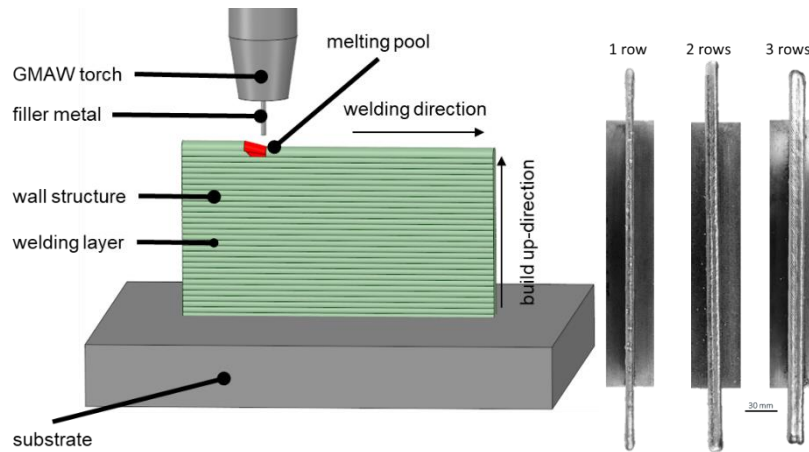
additive manufacturing of a wall structure (left: schematic of WAAM process; right: wall structures with one, two and three adjacent rows)
